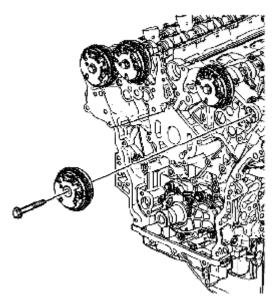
Identifying Crankshaft Sprocket Courtesy of SUZUKI OF AMERICA CORP.
